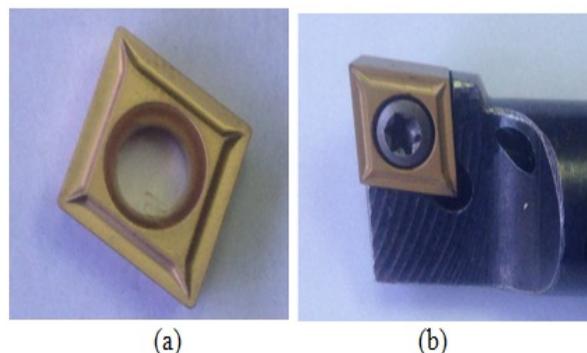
(a) Carbide (TiN) cutting tool insert (b) Tool holder.
